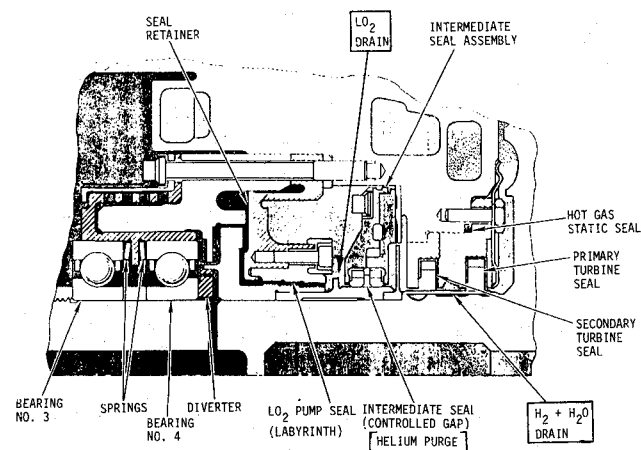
Schematic of Space Shuttle Main Engine high-pressure oxygen turbopump bearings and seals.
